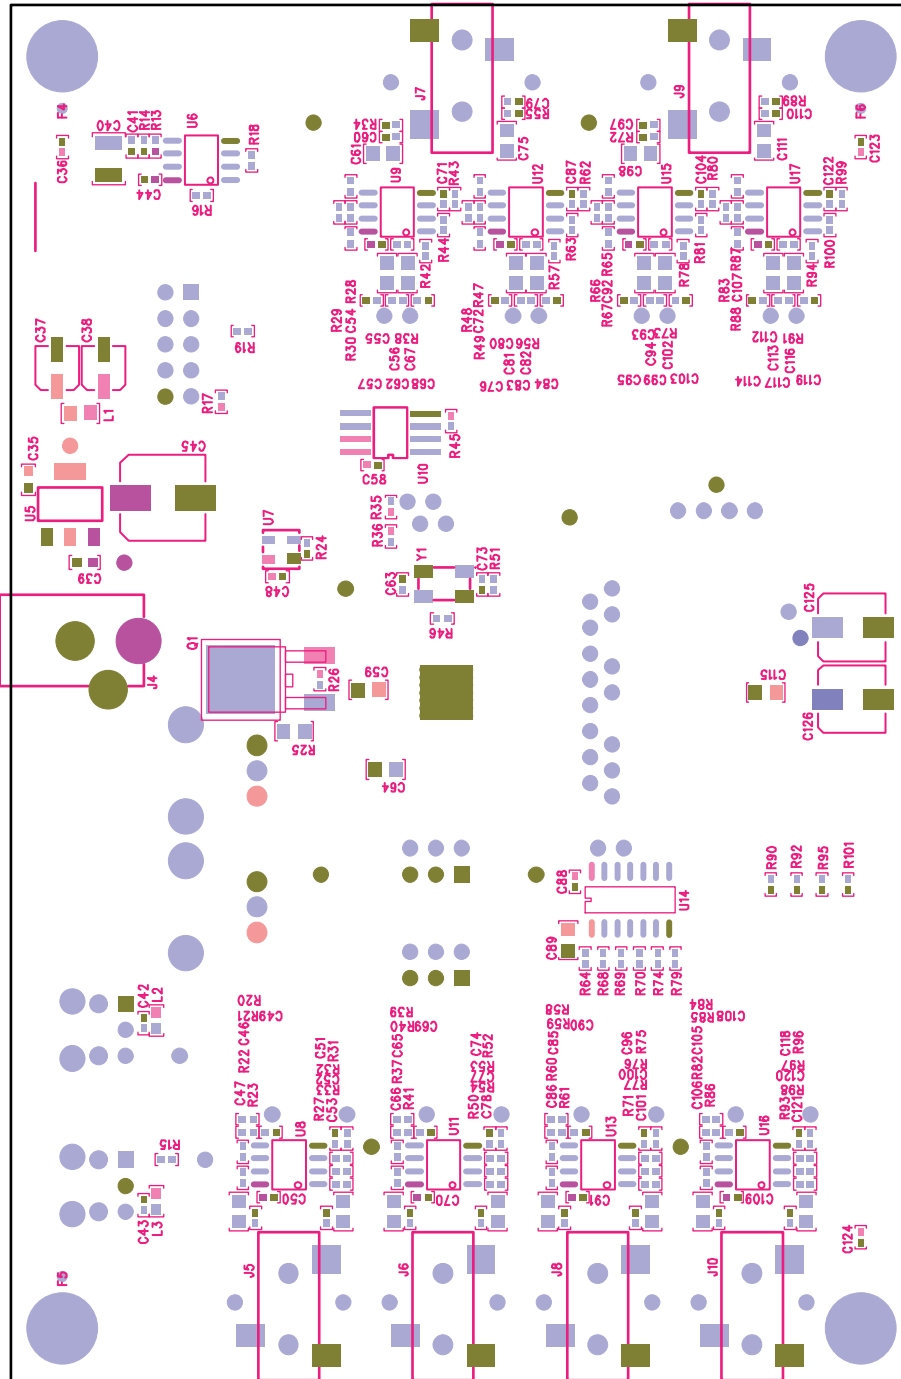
EVAL-ADAU1466Z Layout, Bottom Assembly (Viewed from Below)
